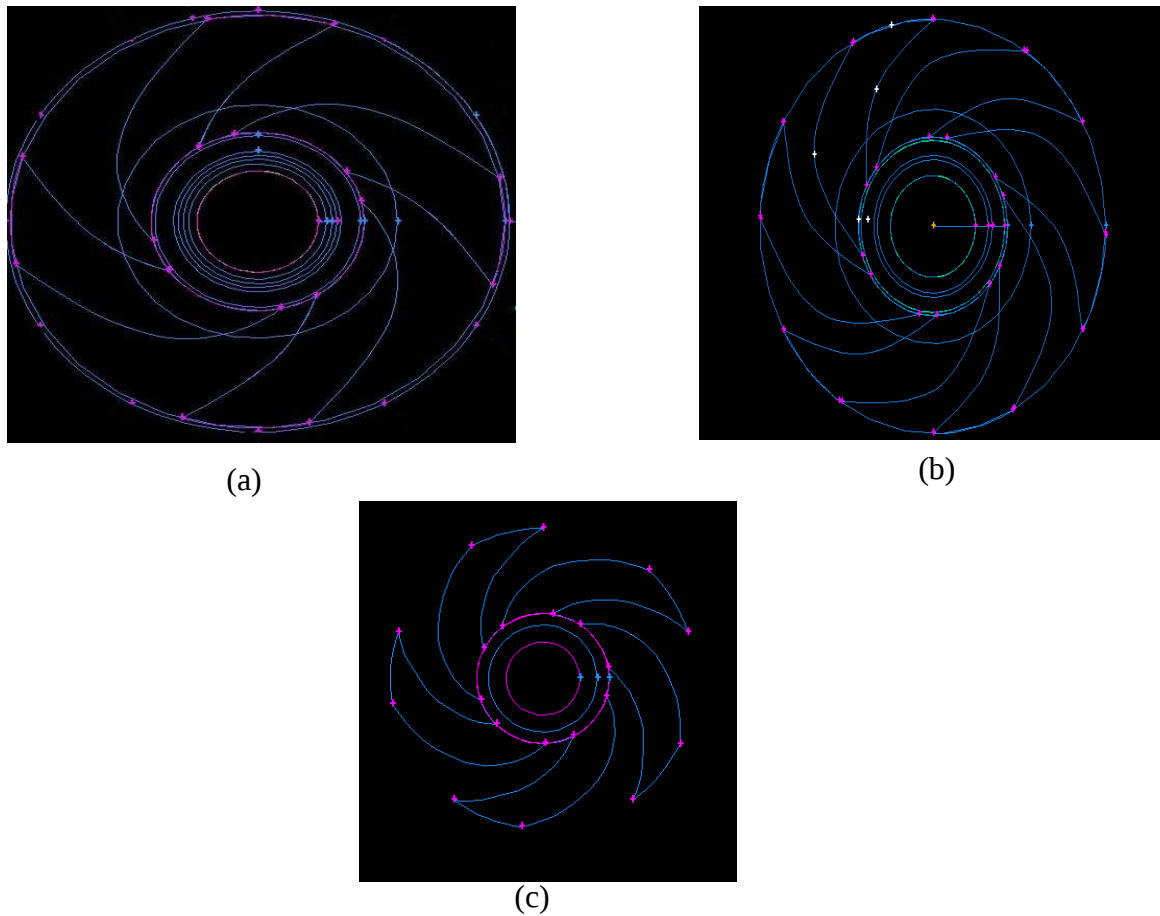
impeller design (a) 4 blade (b) 5 blade and (c) existing model with 5 blades
